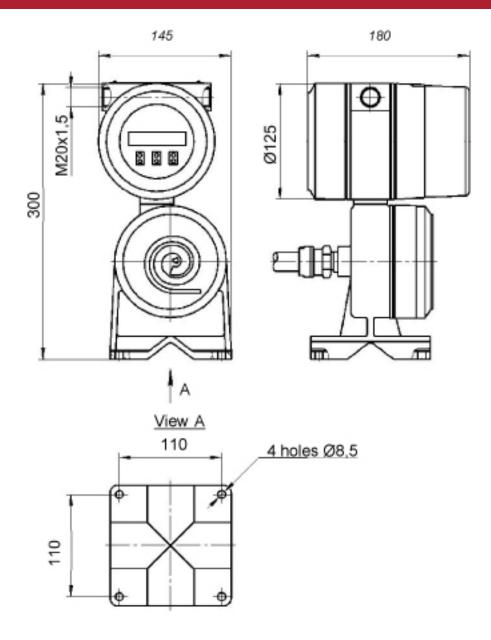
BRACKET FOR FIXING REMOTE TYPE ELECTRONIC UNIT ON THE ASSEMBLY STAND
